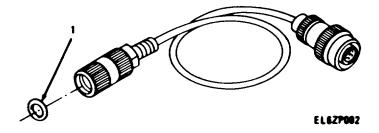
Cable Assembly, Special Purpose Electrical CX-13156/GR.
